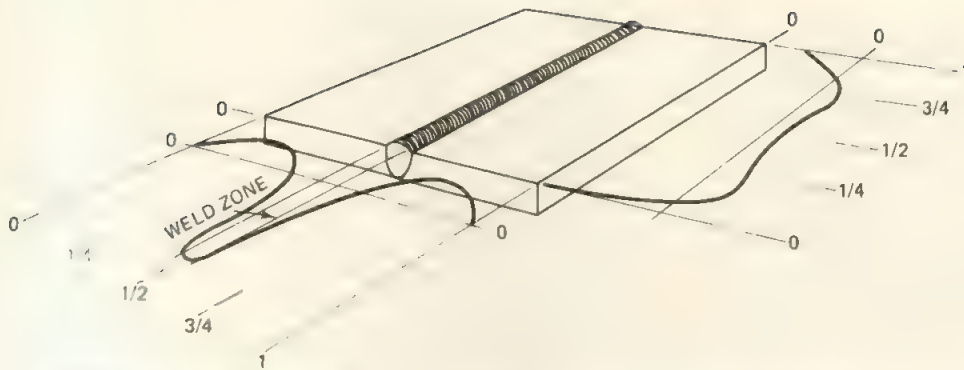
Butt welded joint: residual stress pattern.
